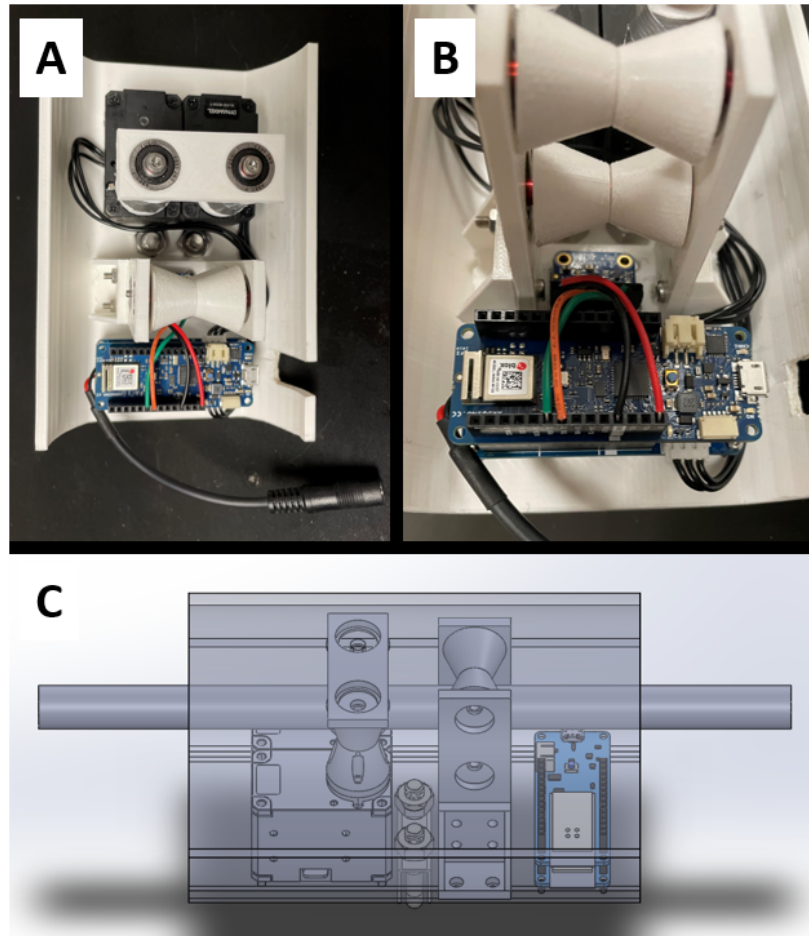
MDR test prototype. A) Top level view of the motors, drive wheels, rollers, and microcontroller. B) Front view of the rollers, accelerometer, and microcontroller. C) Side view of the CAD model.
